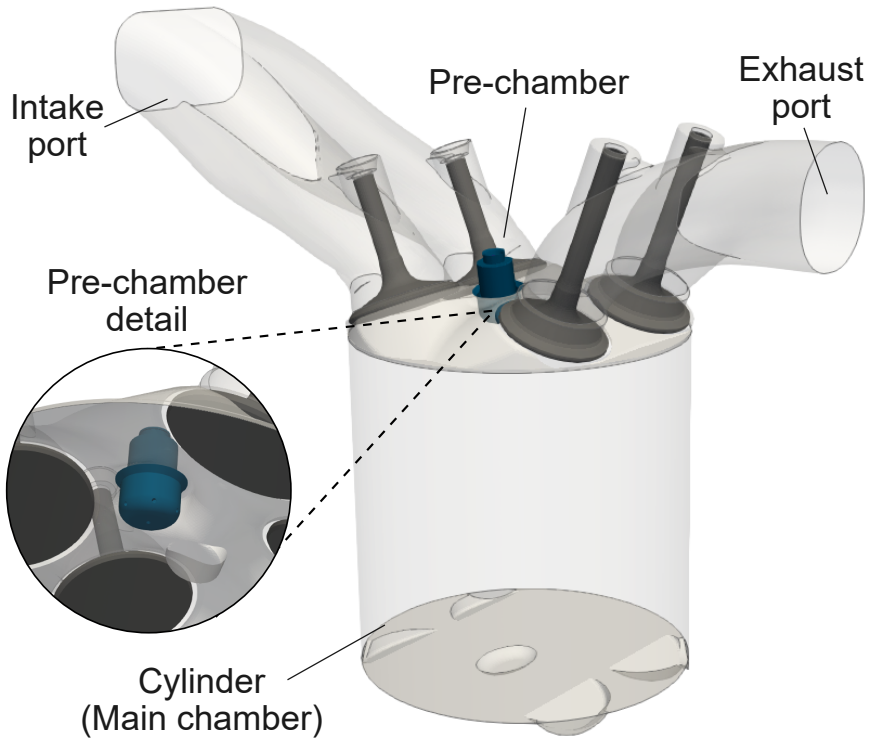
Schematic view of the pre-chamber assembly in the engine head.
